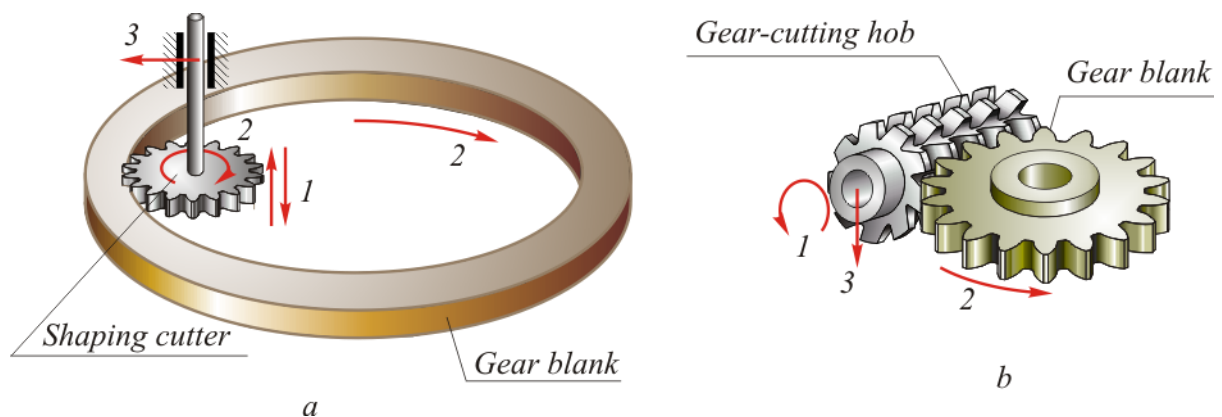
Main motions of a gear-cutting tool and gear blank in the generating cutting process: *a* – with using the shaping cutter; *b* – with using the gear-cutting hob
